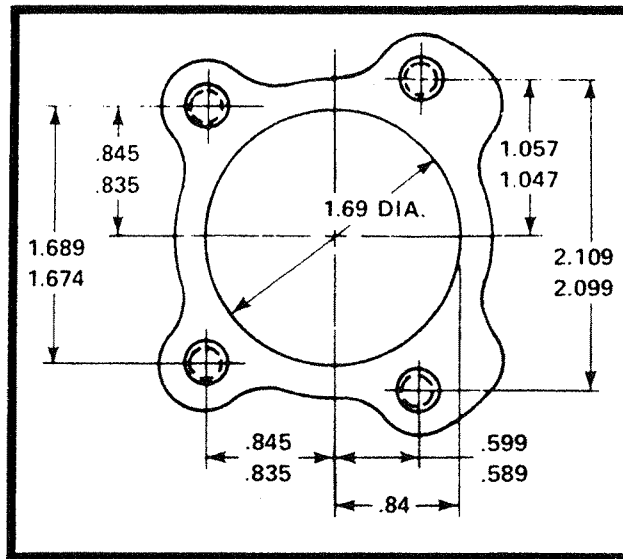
EXHAUST FLANGE DIMENSIONS.
